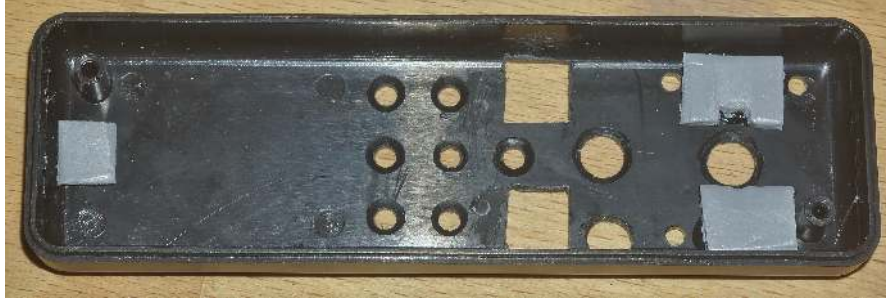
New PCB mounting pads made from 3 mm thick Forex PVC
